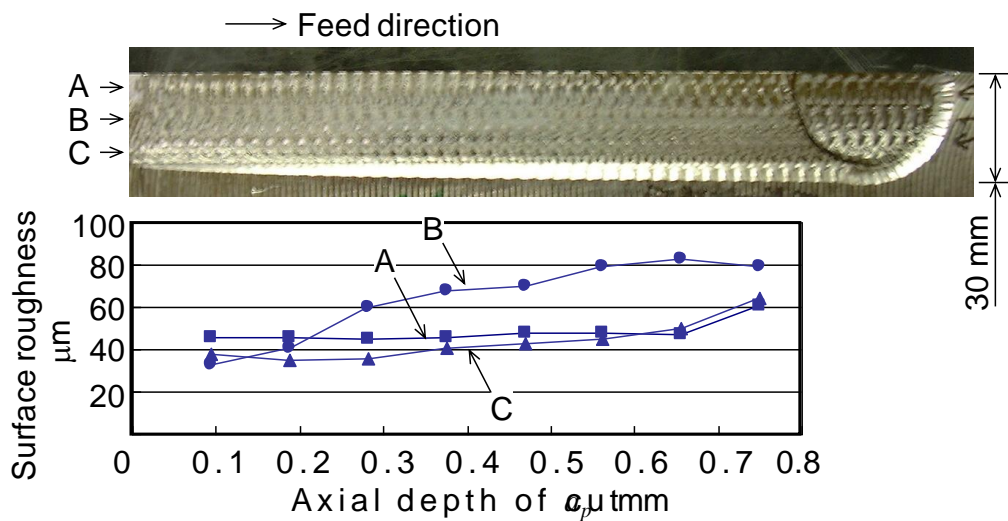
44 Surface roughness of work piece machined with a conventional tool.
